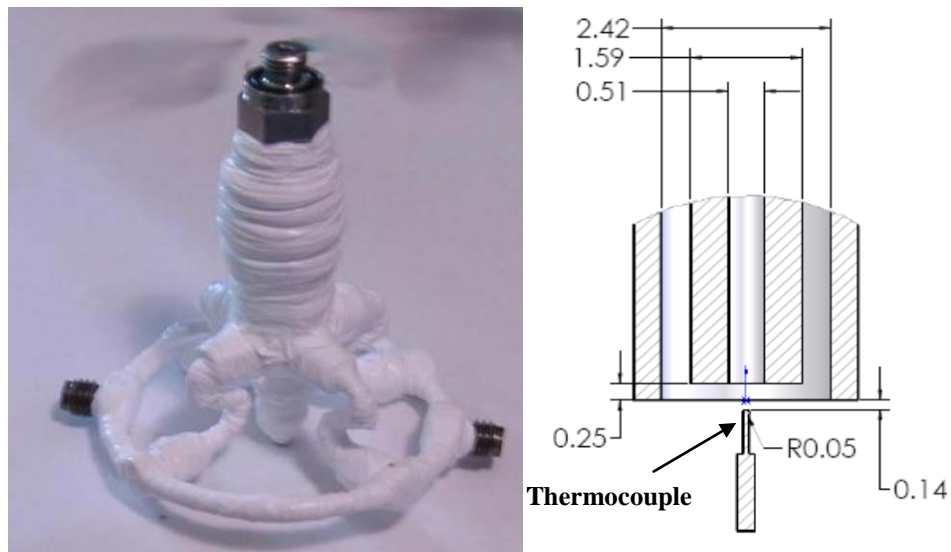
Picture of the shear-coaxial injector (left) and a cross-section drawing of the injector tip. The thermocouple used to measure exit-plane temperature profiles is shown in the drawing.
